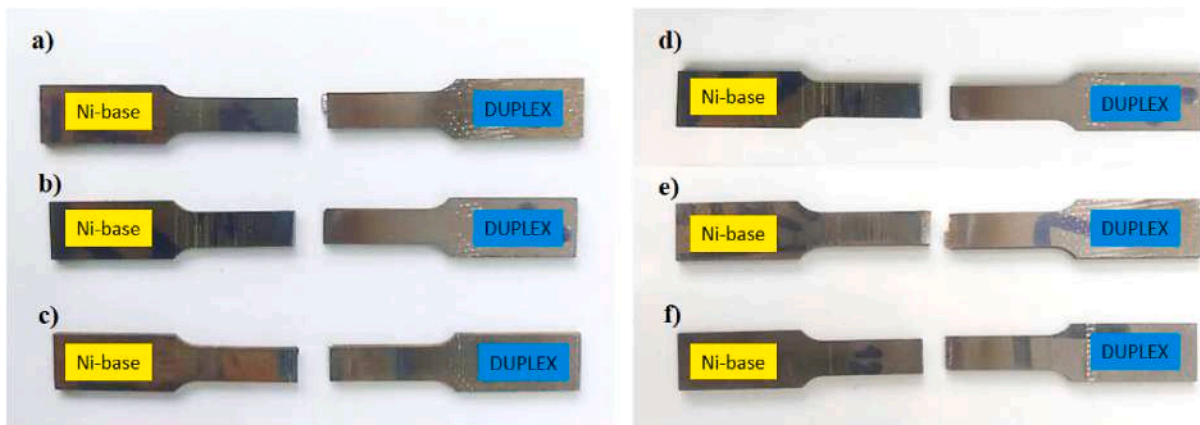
Tensile samples appearance after failure at welding speed of 200 mm/min and laser power of a) 250 W, b) 350 W, c) 450 W and at laser power of 350W and welding speed of d)200 mm/min, e) 300 mm/min, f) 400 mm/min.
